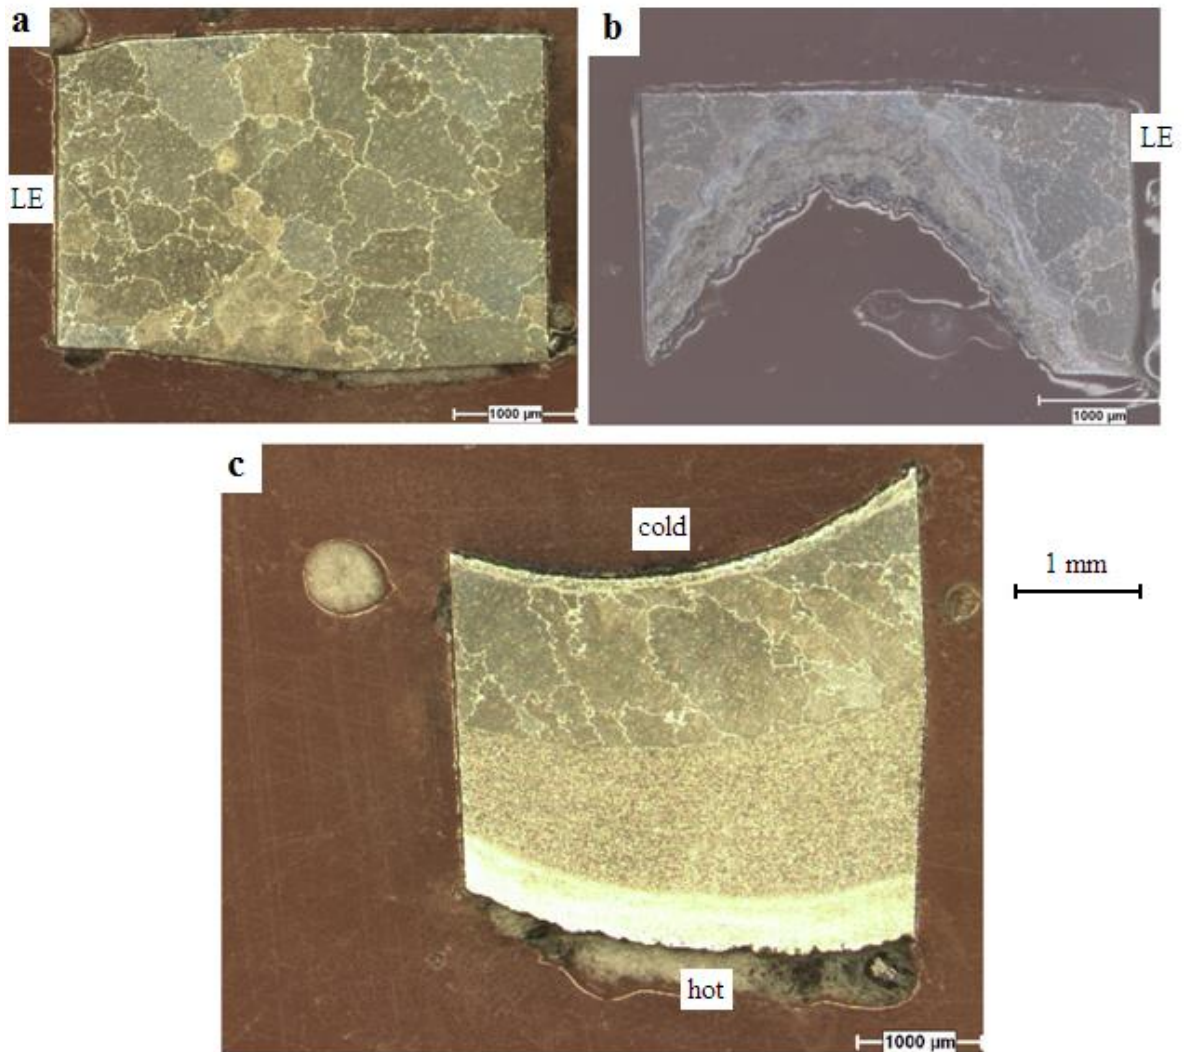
Grain morphology in PTL (Pressure side Tip section Leading edge), a) cold surface, b) hot surface, and c) z surface specimens.
